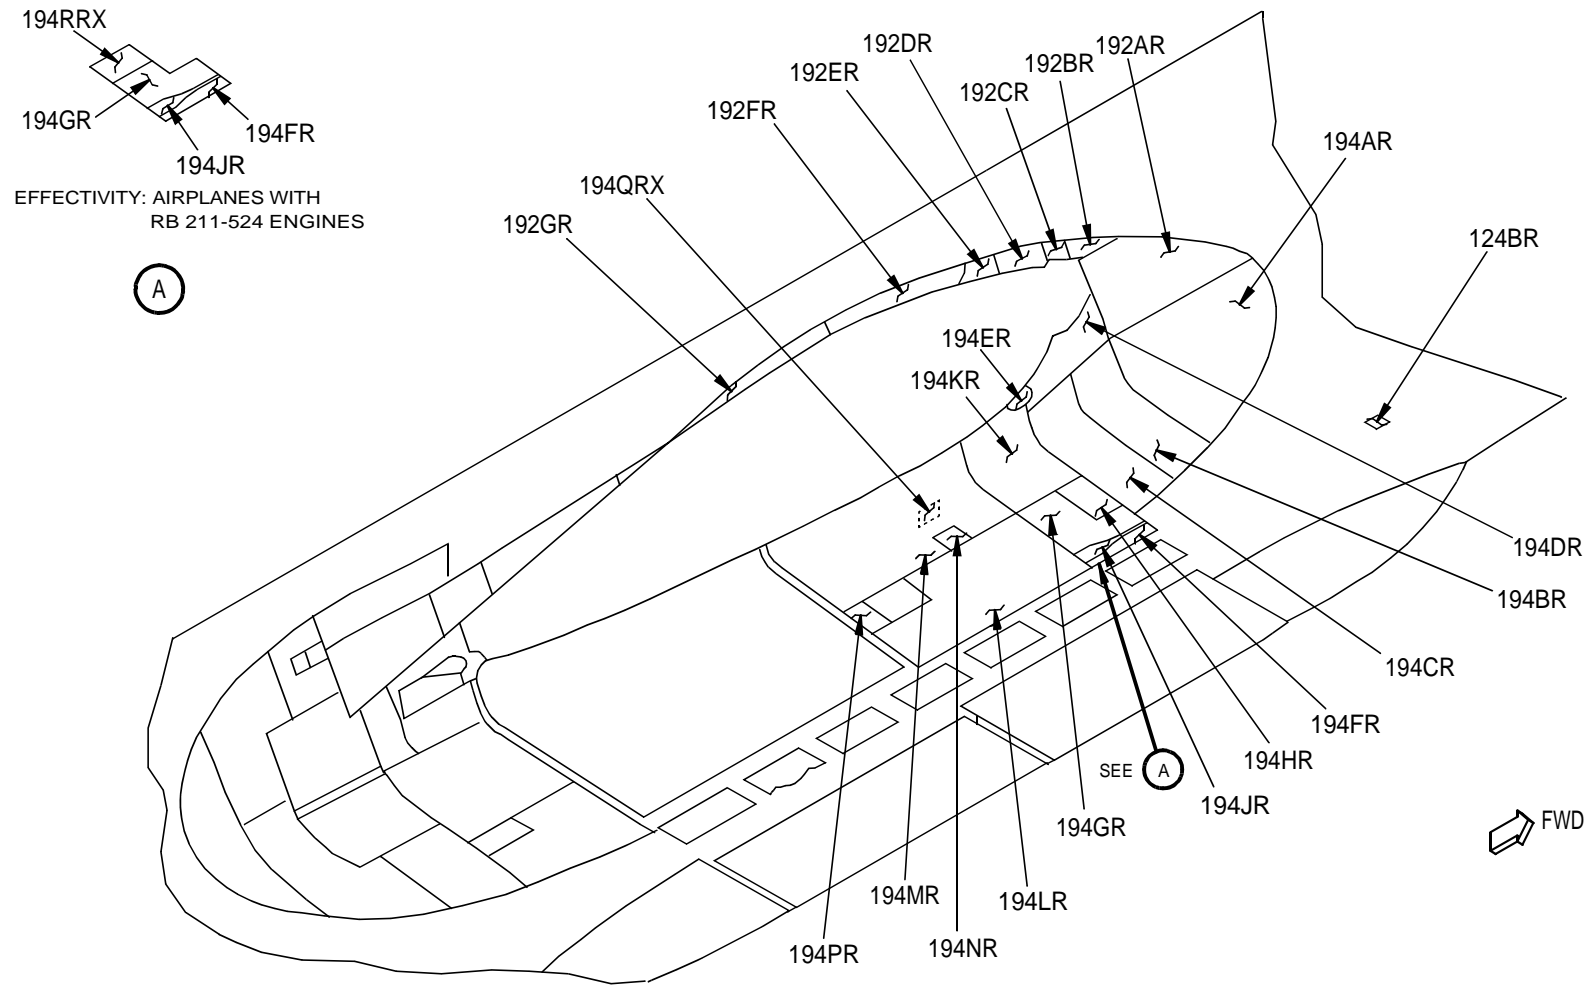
SUB-MAJOR ZONE 190 WING-TO-BODY FAIRING - RIGHT, FORWARD
